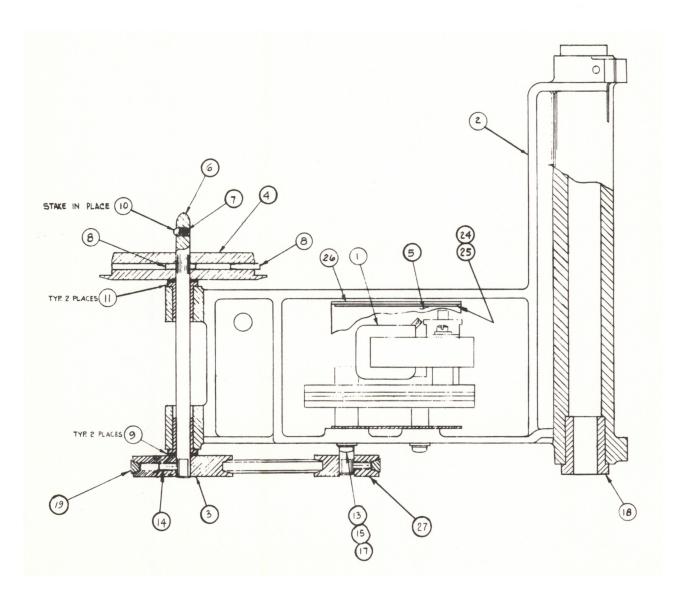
Arm Assembly, Turntable Dwg. No. 23283F
